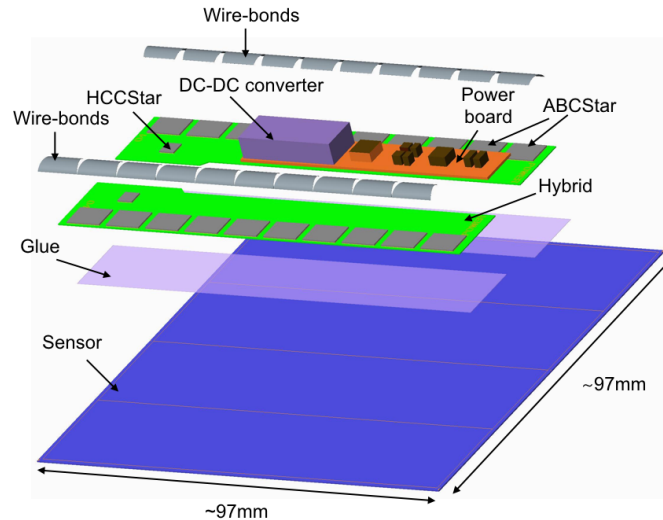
Blow-up drawing of an ITk Strip barrel module. [28]
